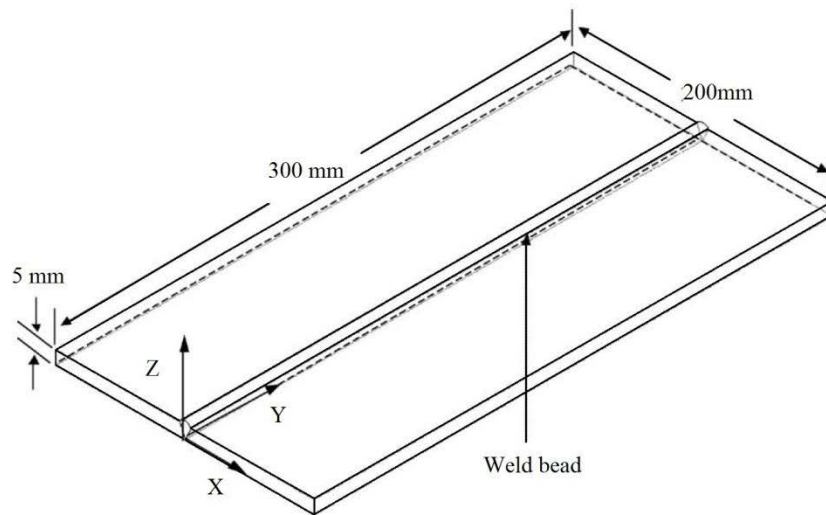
Geometry of single-pass butt-welds. (Teng et al., 2003)
